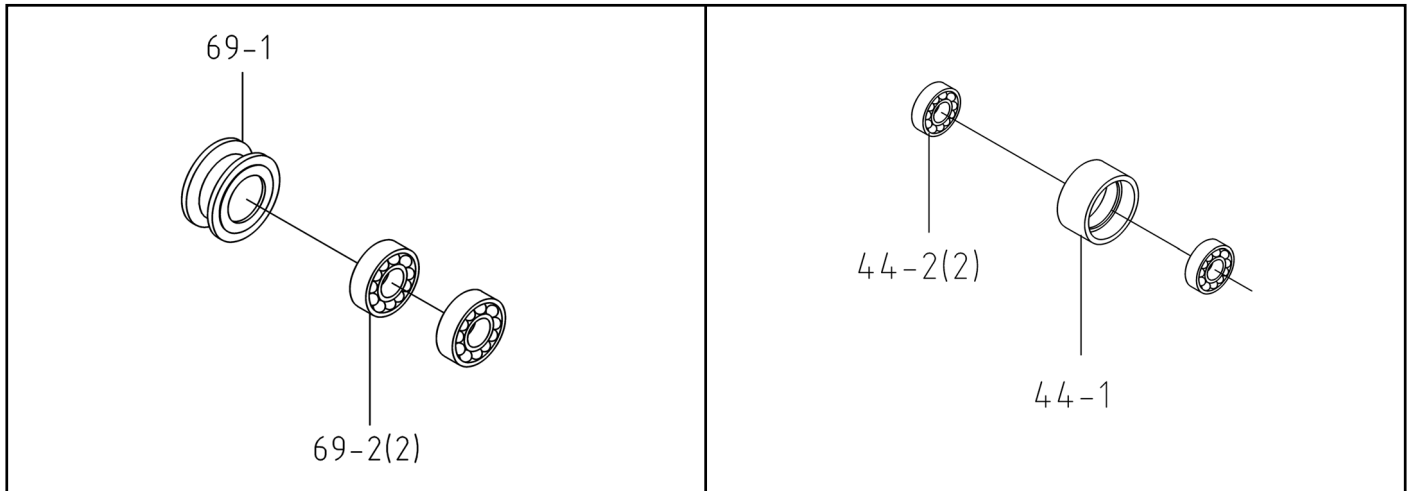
Exploded View of the VSF-14 Smooth Wheel Assembly
